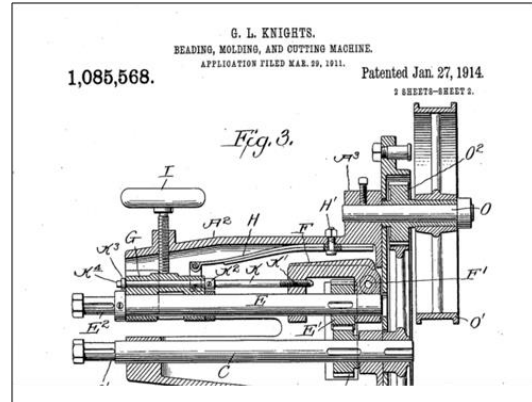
Knights’ “beading, molding and cutting machine.” Knights describes it as a “simple and efficient machine by means of which molding and beading can be quickly and easily formed in sheet metal” for automobile and carriage metal body work.
